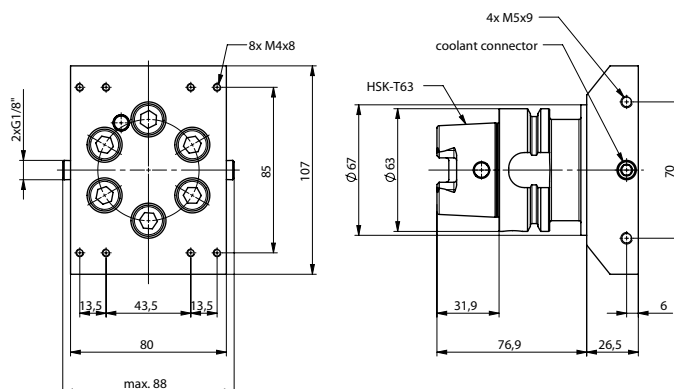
Machine adapter with HSK-T63 for disk-type turret with HSK-T clamping unit, Type 9119AH63S
